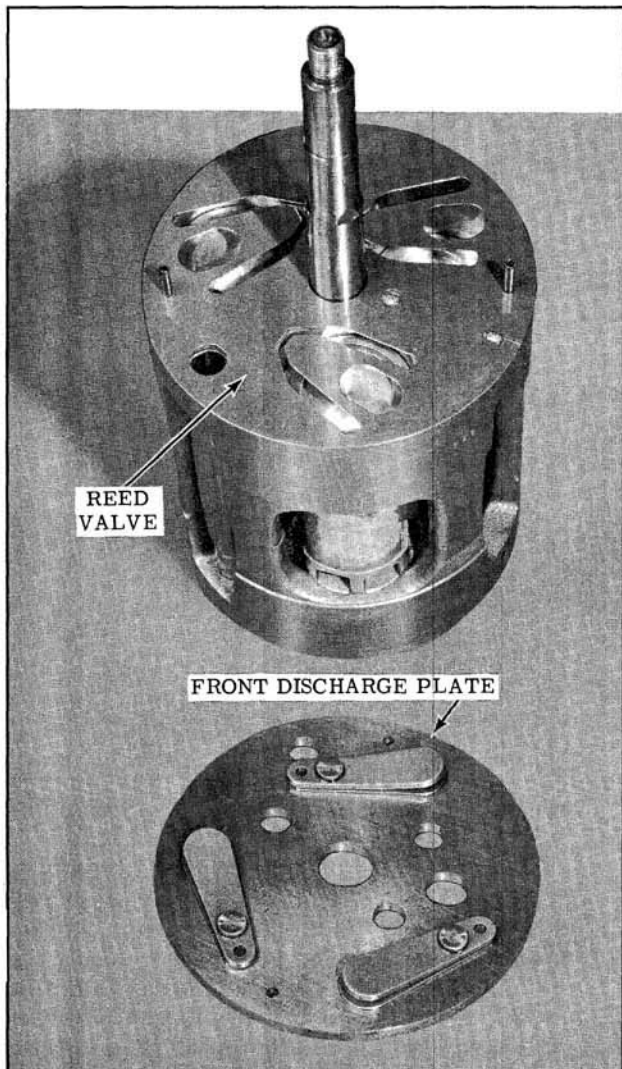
Front Head Discharge Plate and Reed Valve
